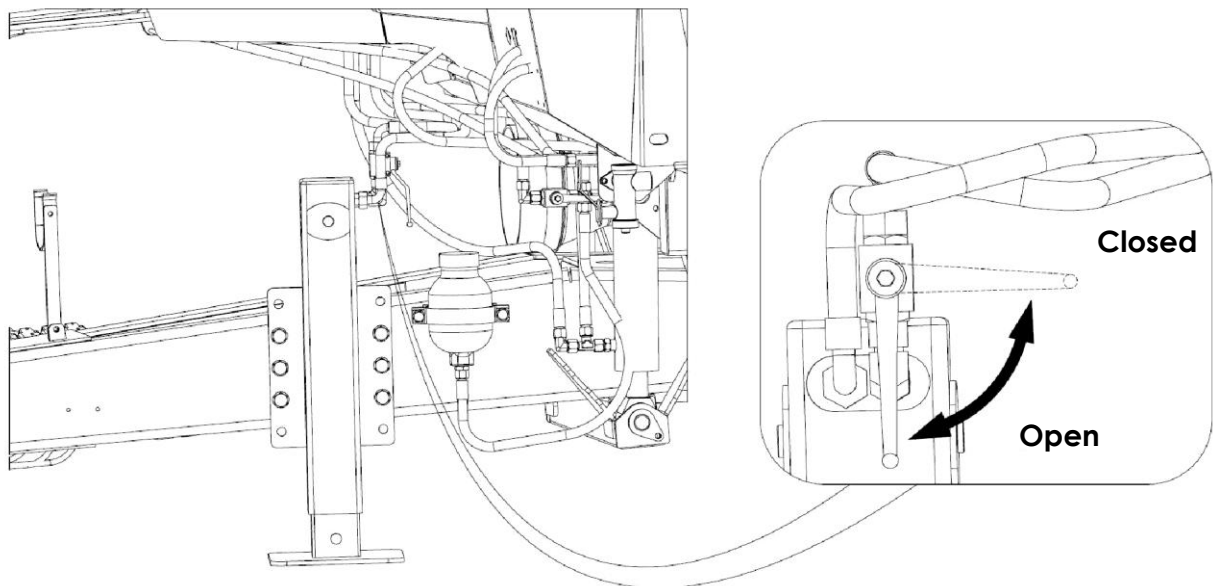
Hydraulic valve to control (shut off) the hydraulic parking jack
